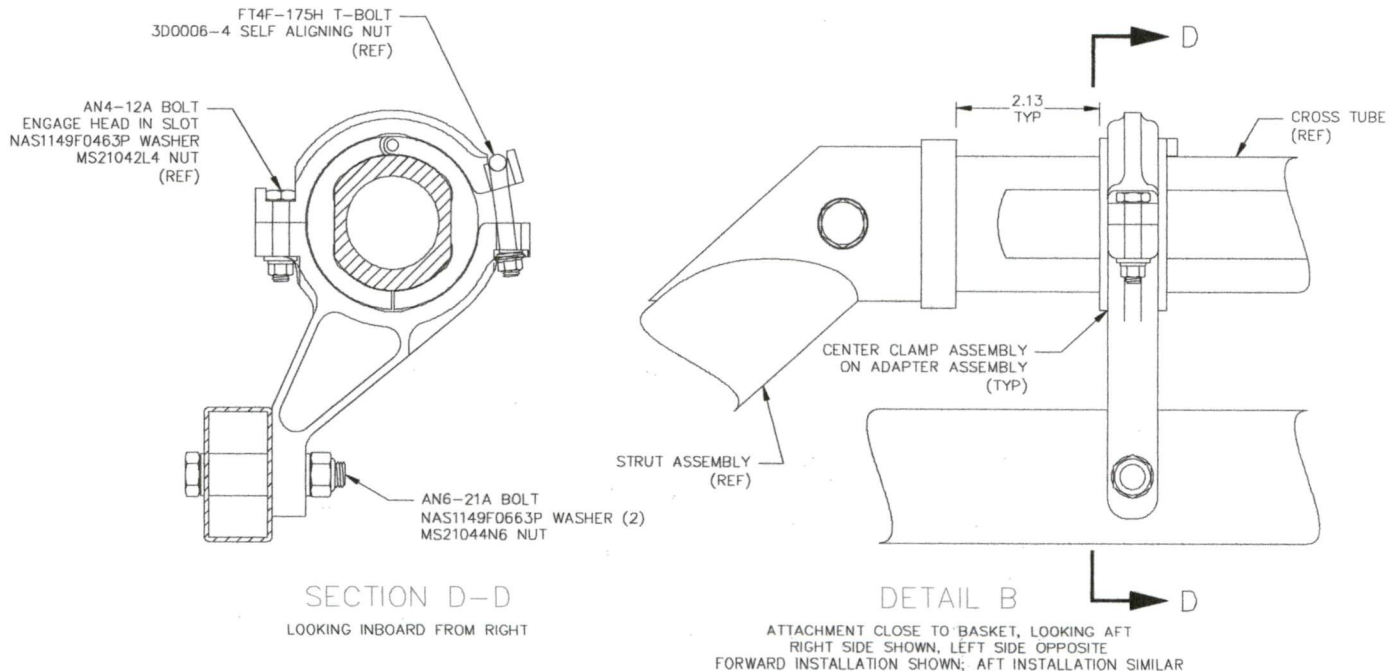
Clamp Assembly Installation, Revised Landing Gear
